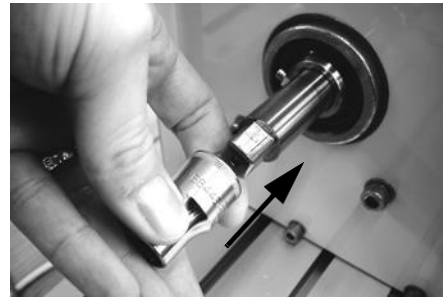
Fit the sockets to the Torque Head and the Gearbox Output
